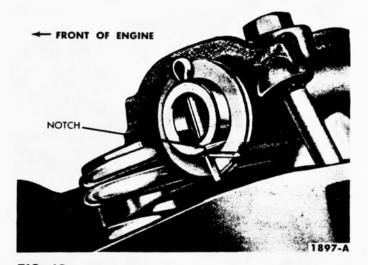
Valve Rocker Arm Shaft Identification Notch
